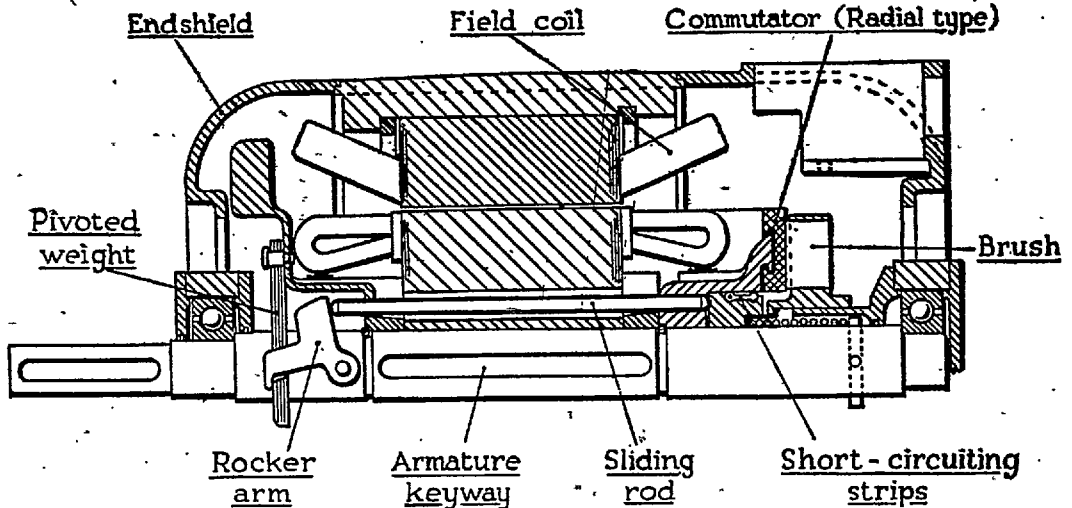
Short-circuiting, brush-lifting type A.C. motor
